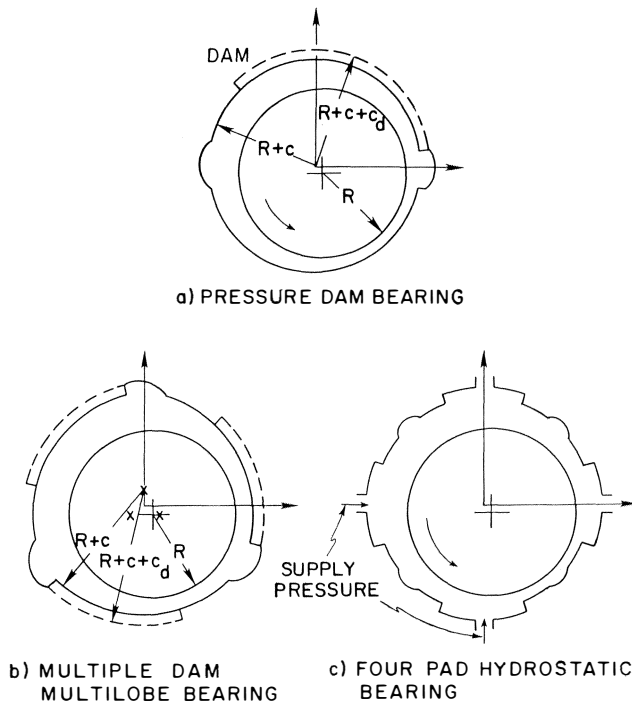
Fixed Pad Journal Bearings with Steps, Dams, or Pockets.
